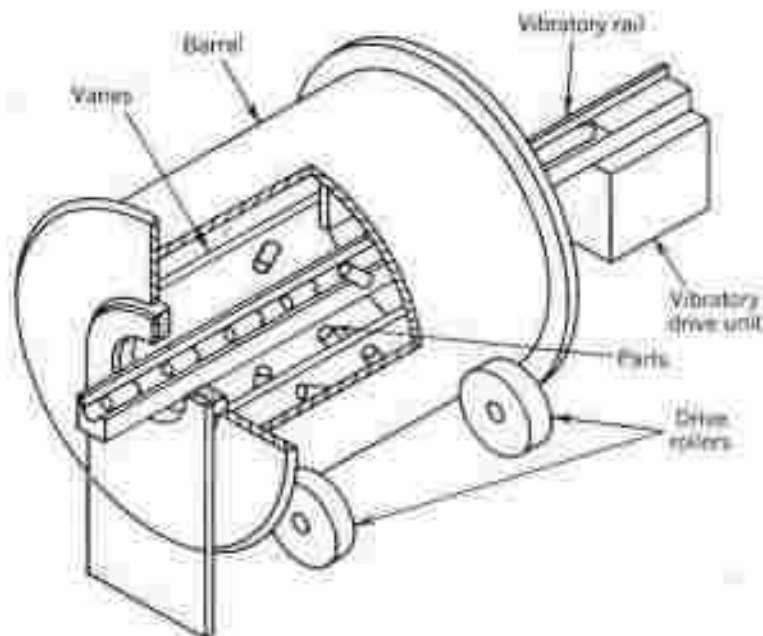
Bladed wheel hopper and tumbling barrel hopper for the feeding of durable cylindrical parts, (b) Tumbling barrel hopper
